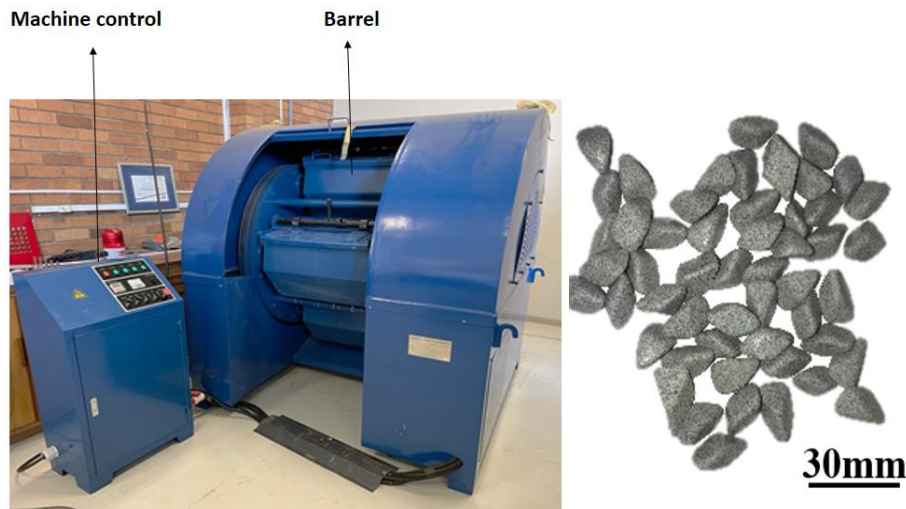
CB320-CBF machine and ceramic media used to polish the samples.
